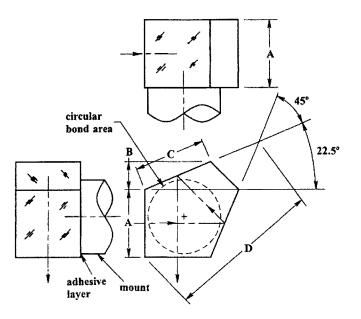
Penta prism. (For design and analysis, use File 6.18 of the CD-ROM.) $t_A = 3.414A = 5.121$ in. (130.073 mm); B = 0.414A = 0.621 in. (15.773 mm); C = 1.082A = 1.623 in. (41.224 mm); D = 2.414A = 3.621 in. (91.973 mm); $V = 1.500A^3 = 5.062$ in.³ (82.951 cm³); $W = V\rho = 0.459$ lb (0.208 kg); $Q_{MIN} = V\rho a_G f_S/J = 0.014$ in.² (9.032 mm²); $Q_{MAX C} = 1.129A^2 = 2.540$ in.² (1638.868 mm²).
